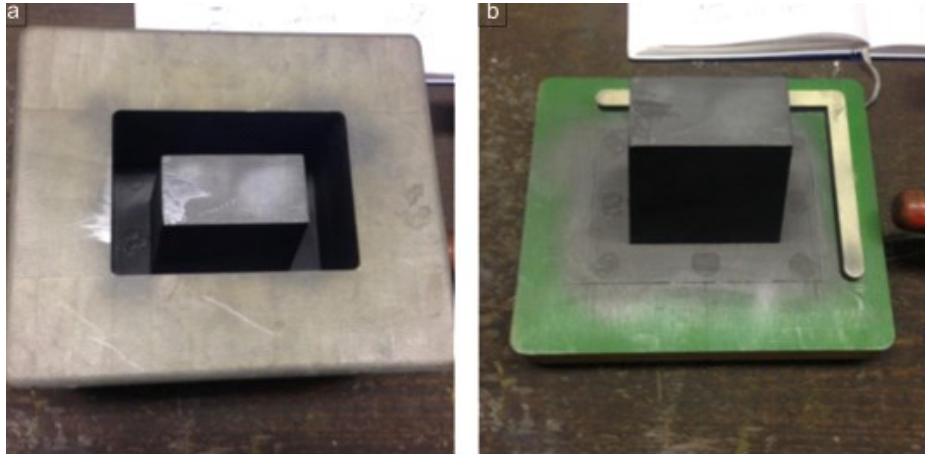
Wooded mould for making outer cores (a).the entirety wooden mould (b) the wooden foundation
